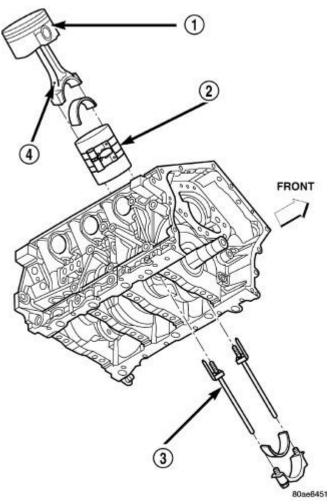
Piston And Connecting Rod Courtesy of CHRYSLER LLC
